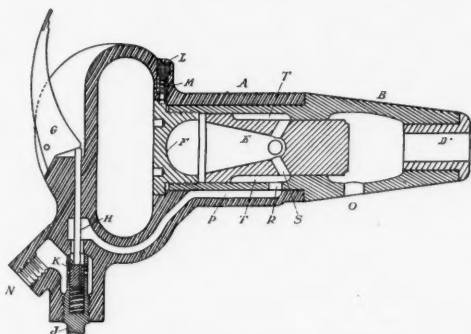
Single Pneumatic Hammer—The Ridgeley & Johnson Tool Co.
